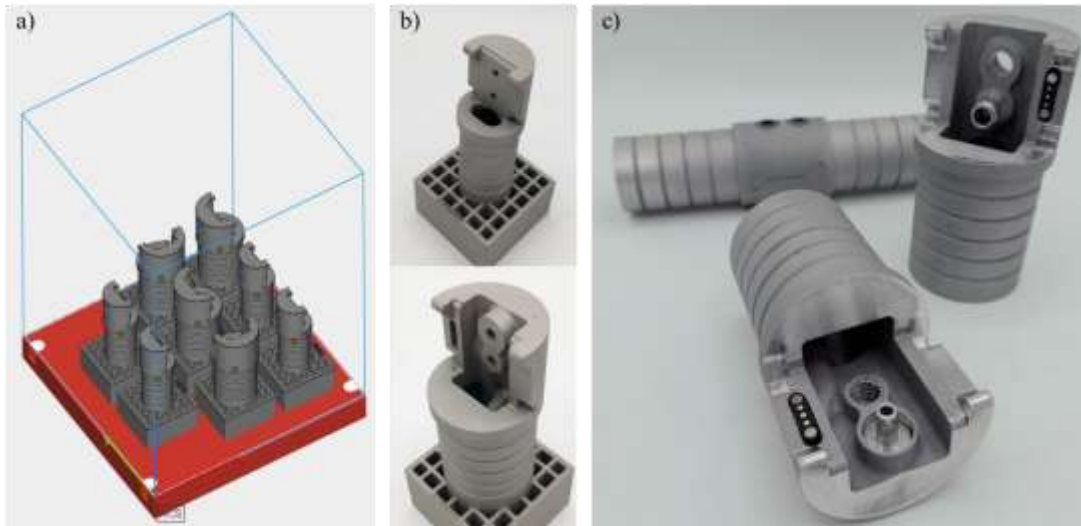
(a) Arrangement of the joints on the LPBF build plate; (b) joints in the as-built condition before support removal and sandblasting; (c) joints after machining, with the hydraulic and electrical connectors assembled.
